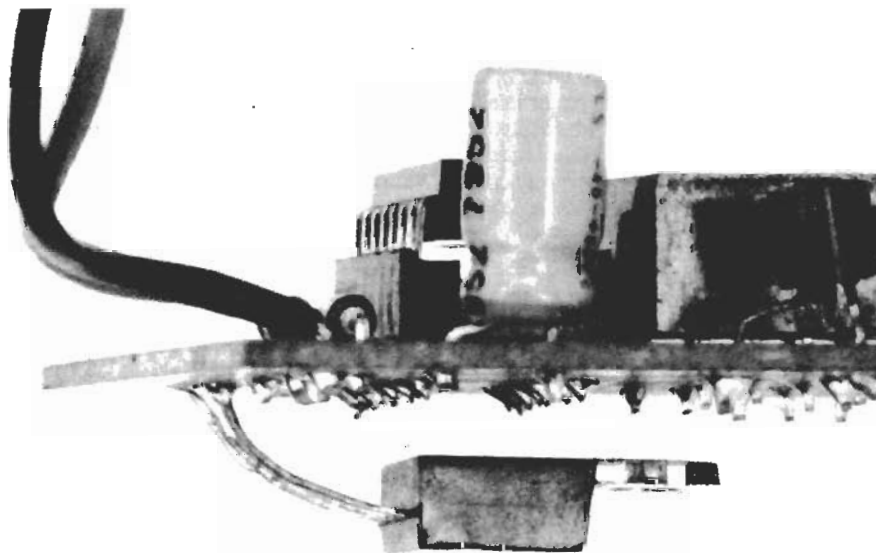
THE FIVE-VOLT regulator is mounted on the bottom of the PC board, exactly as shown.
